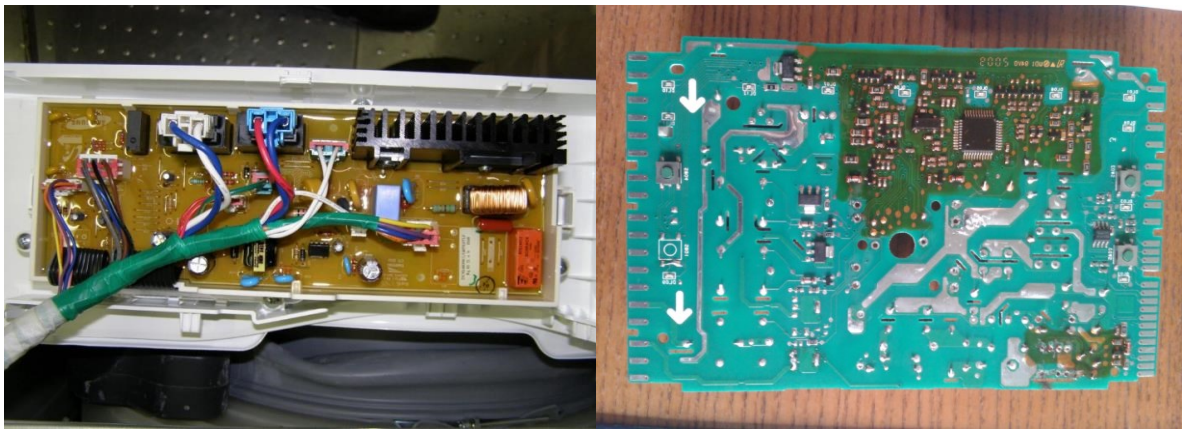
Resin layer electronic — technicians generally replace the whole board, but repair or substitution of components on the printed circuit board are possible. In some cases, resin coated PCBs (PCB on the left side and dark-green area of the PCB on the right side) are impossible to repair, as this type of layer cannot be re-soldered and components cannot be replaced, in case of failure.
